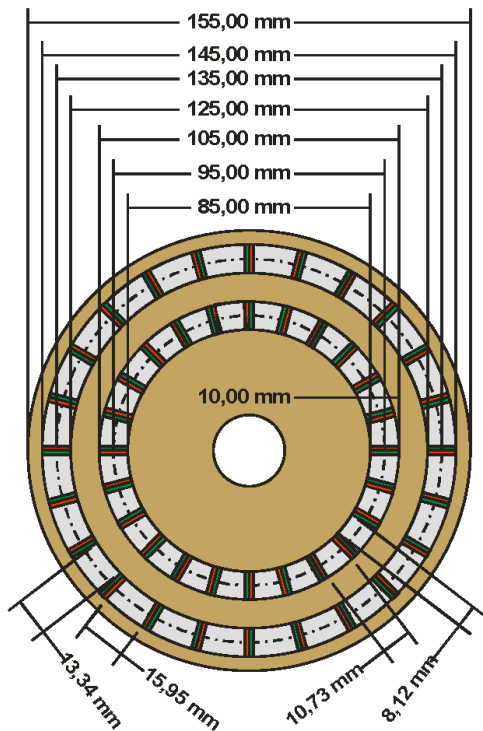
cross sectional view of the designed Rotor: "Buried magnets", 24 poles, 25 mm thick
